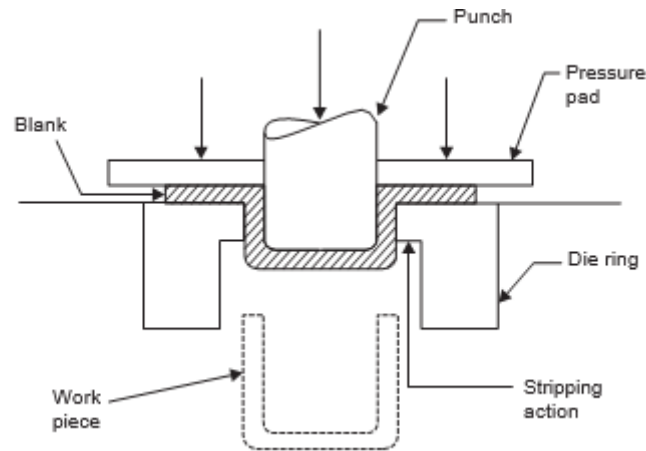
Represent Thick Drawing to the Manufacturing Material
